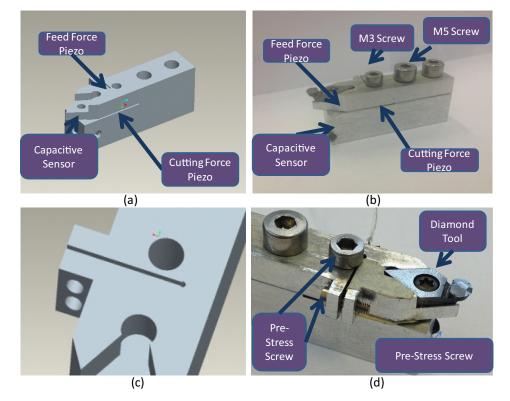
The design configuration of the smart turning tool: (a) 3D model; (b) Prototype; (c) Detail view of 3D model; (d) Detail view of real tool.
